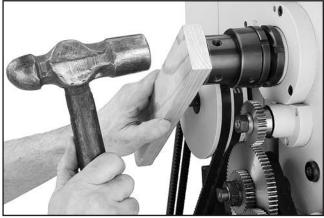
Example of unseating spindle bearings to introduce spindle end-play.
